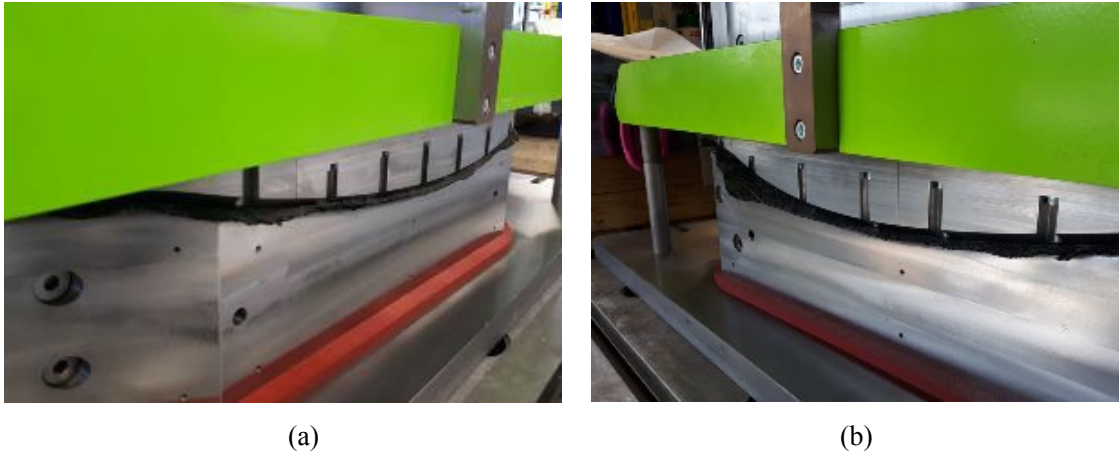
C.4. Ply clamping showing (a) right side of mold; and (b) left side of mold. Source: Alpex.
